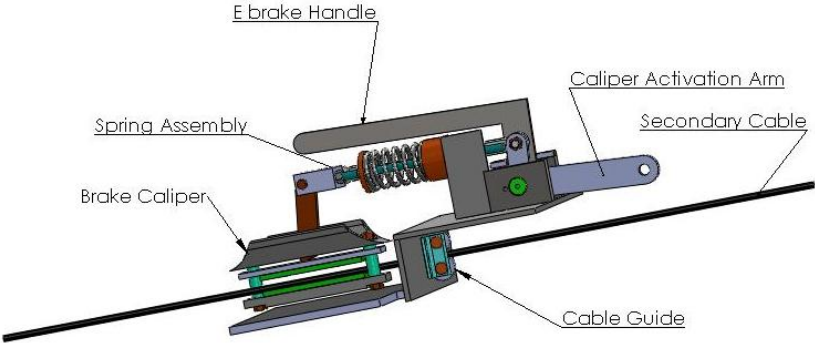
Model of the complete caliper on cable design. (opposite side view)
